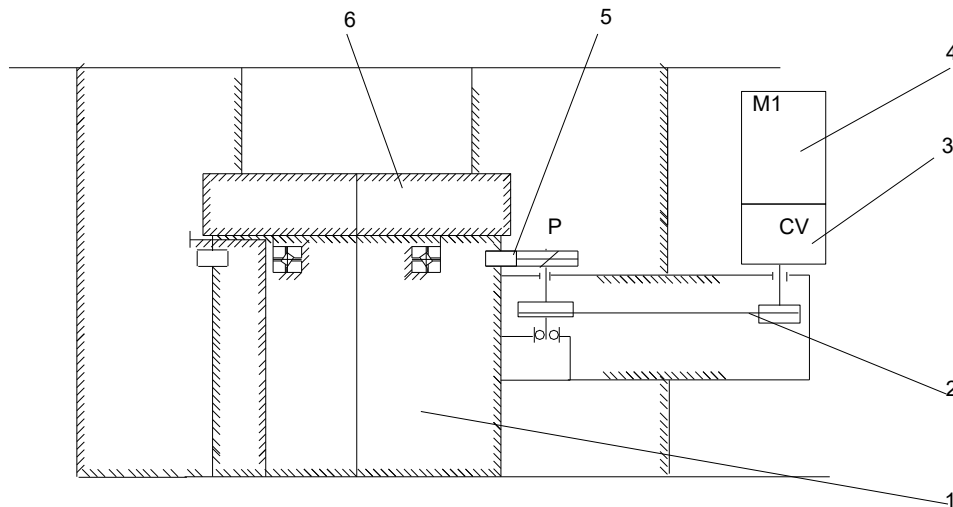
Kinematic diagram of the main kinematic chain and of the circular feed chain in a vertical lathe equipped with hydraulic system for return backlash takeover system with pressure bearing and without rotary fitting
